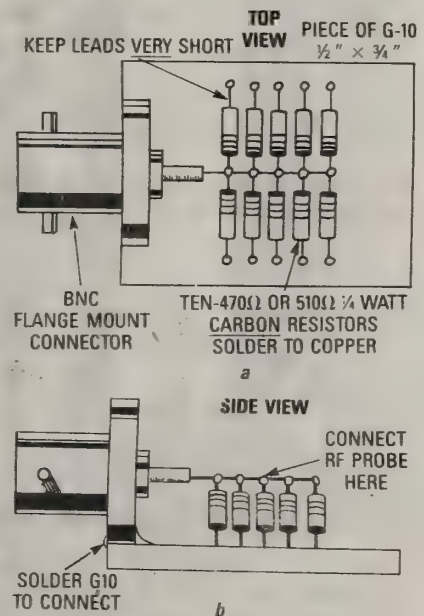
A DUMMY LOAD SHOULD BE USED while adjusting the power output.
